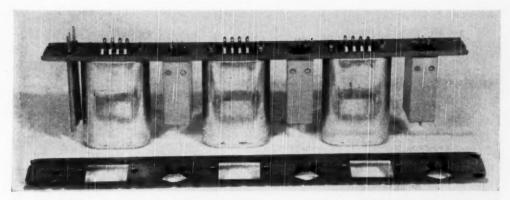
FLAT NARROW-TYPE MOUNTING PLATE ARRANGED FOR MOUNTING A SINGLE ROW OF APPARATUS
